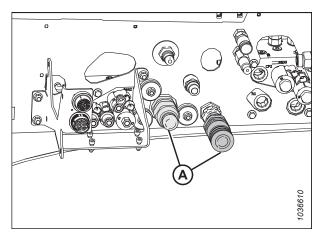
Header Hydraulics Configuration – Rotary Disc-Ready with Quick Couplers
